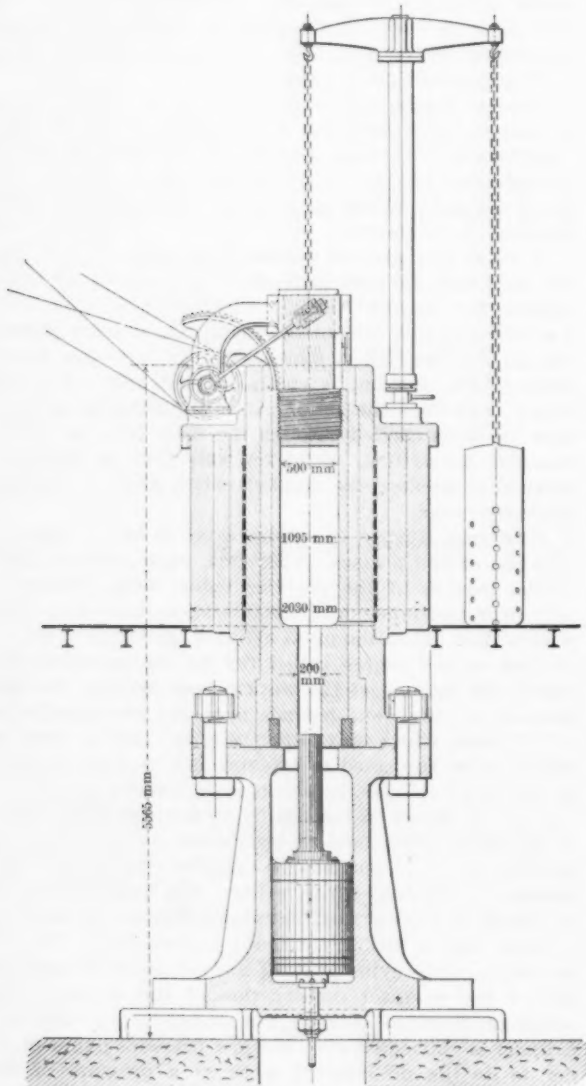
Hydraulic Press with Breech Closing Mechanism.
